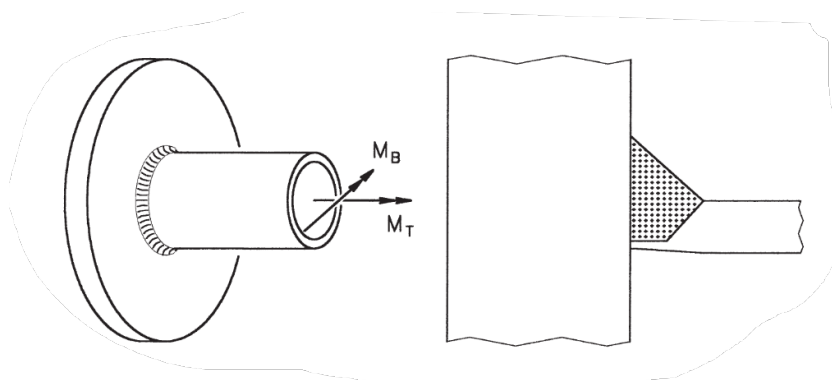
Tube-flange connection investigated and seam geometry by Amstutz et al. [3].
